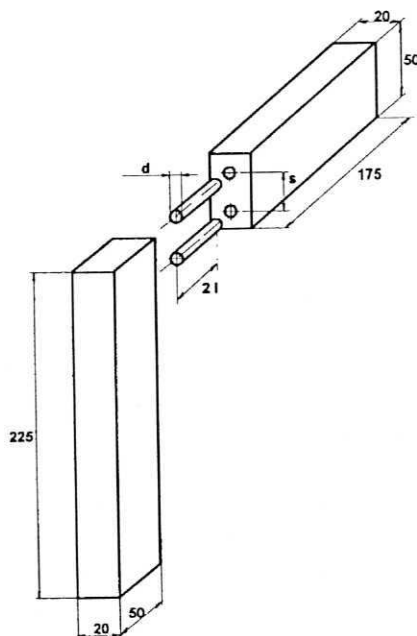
Geometry and dimensions of the dowel corner joint specimens: d – dowel diameter, l – depth of dowel embedment, s – dowel spacing
